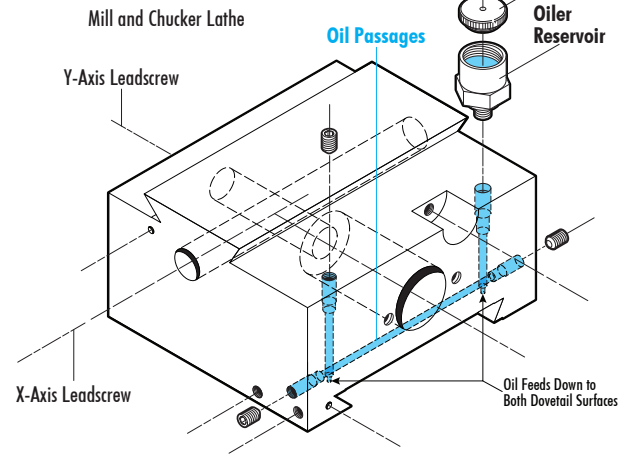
Oil passages for the ball screw mill and chucker lathe saddles are shown in blue.
